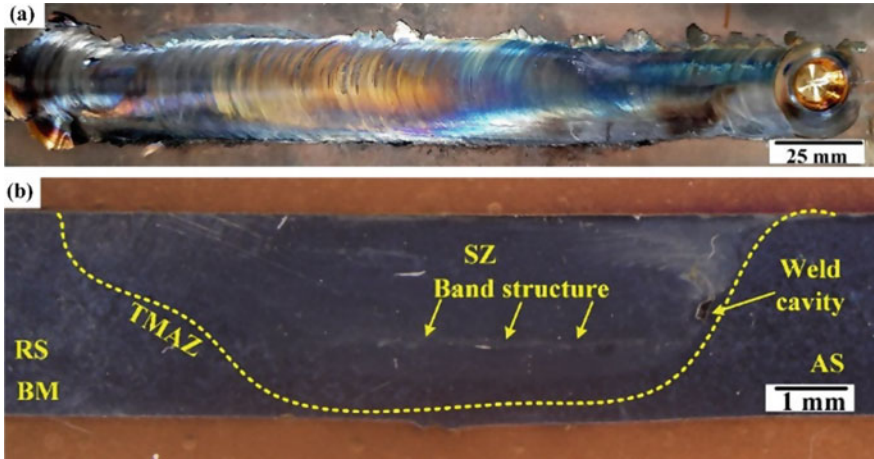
a Top view appearance of the welded sample and b macrostructure of the weld zone
